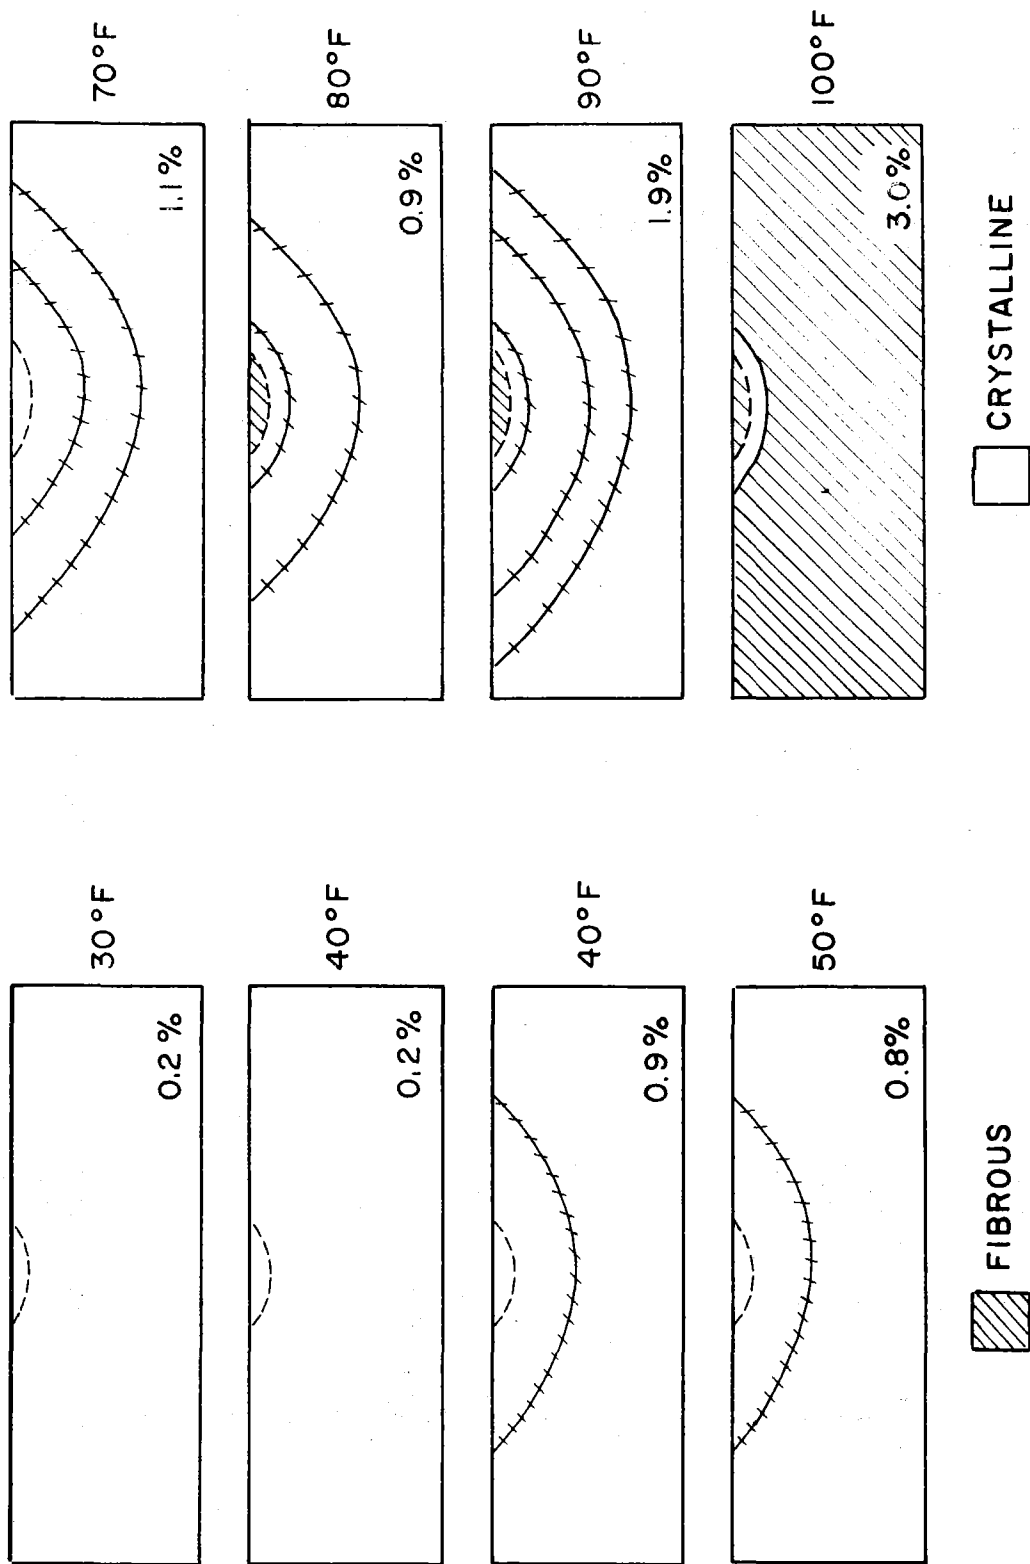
Fracture Behavior of Kinsal Specimens of A-7 Steel Welded with E7015 Electrodes.
